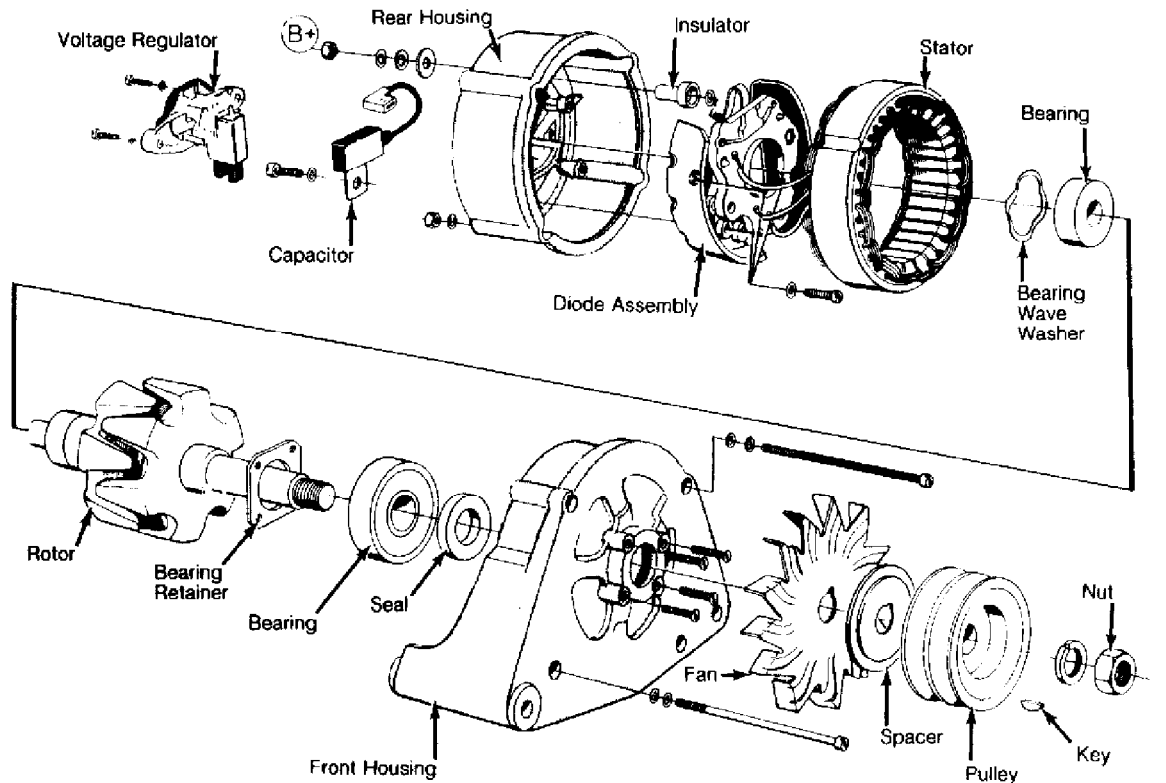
Exploded View of Bosch 55-Ampere Alternator
